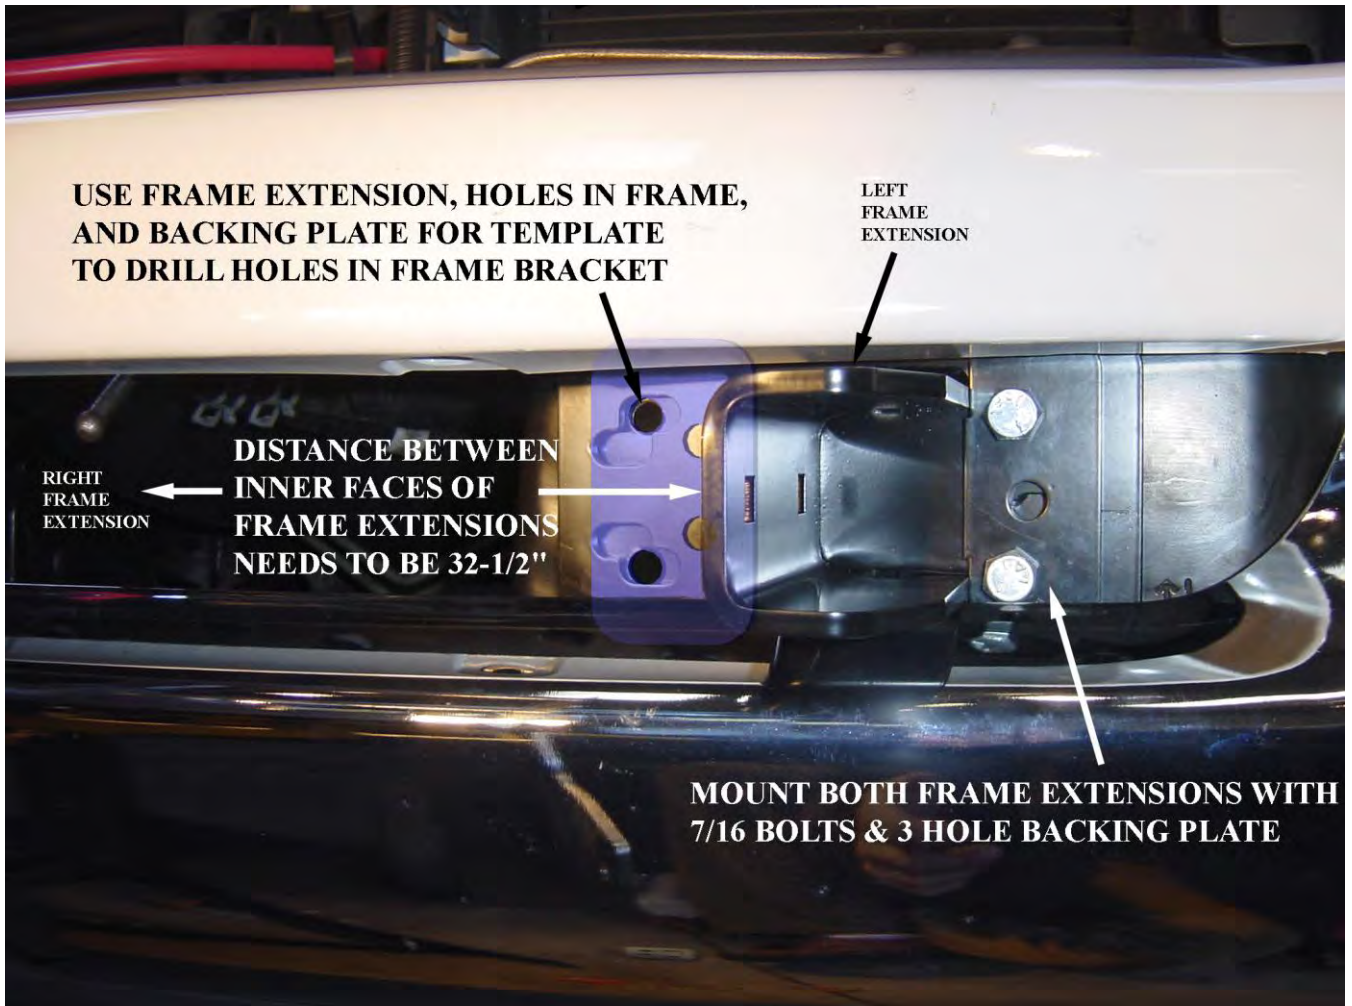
Mount Frame Extensions and drill holes in Frame Brackets (Driver's Side shown).
